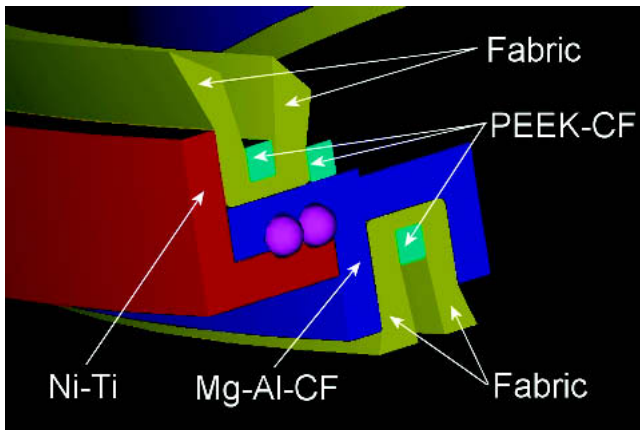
Final bearings materials selection and three dimensional view of bearing
